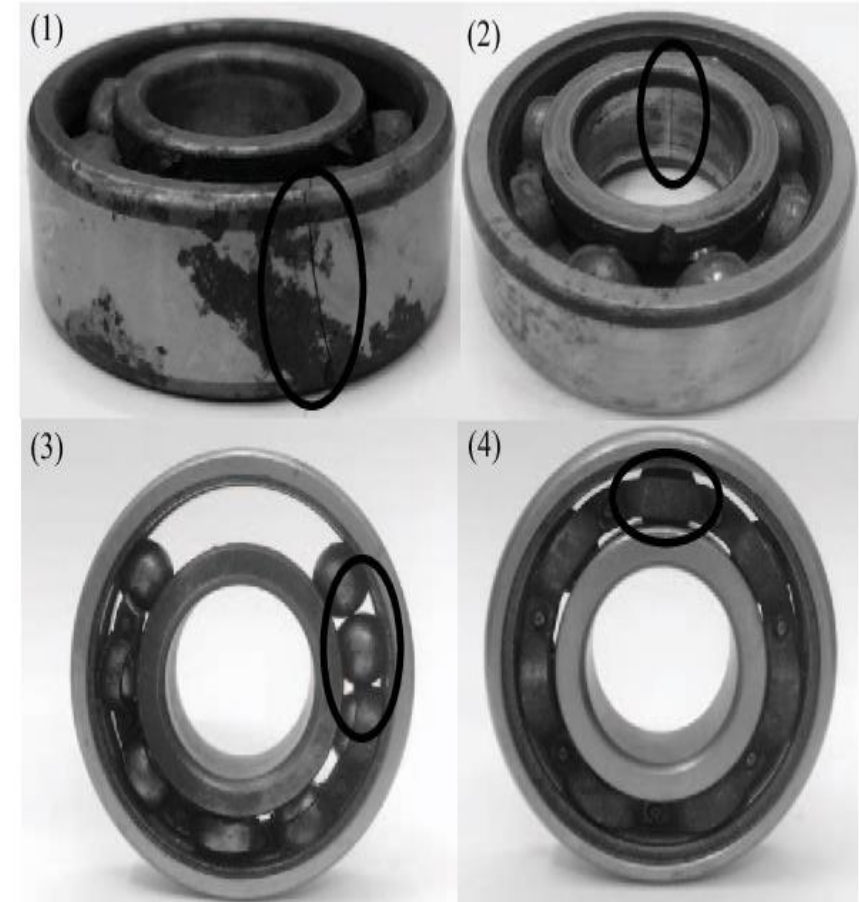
(b): Photos of defective bearings used on fan-side (6204), (1) Outerrace, (2) Innerrace, (3) Cage, and (4) Ball
